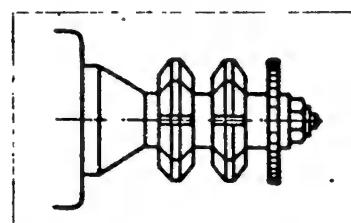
Setting of Cutters on Arbor in Milling in Three Passes
